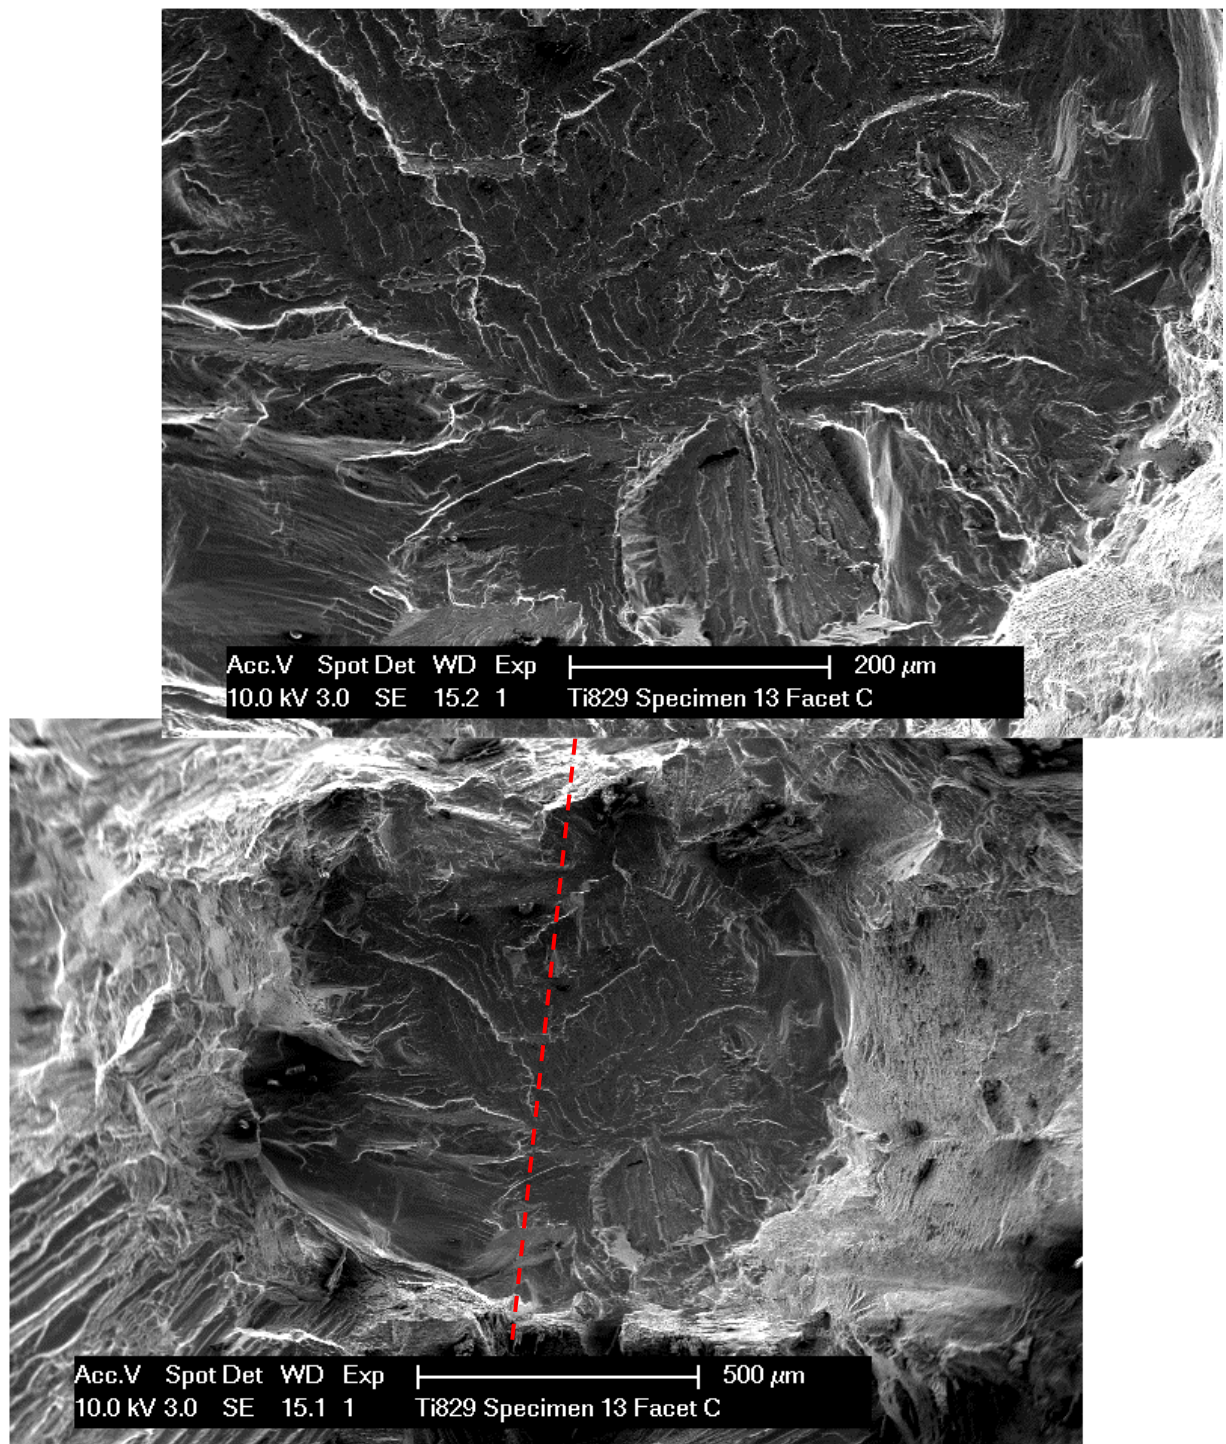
Ti829 dwell LCF test specimen fracture surface – Facet C
